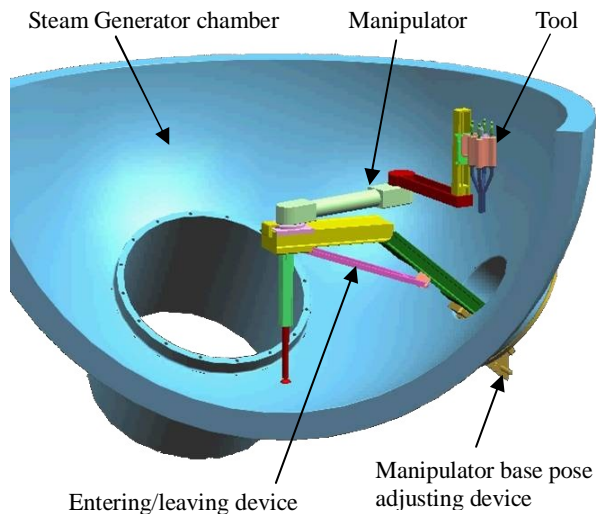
Steam generator heat exchanging tube inspection/maintenance robot.
